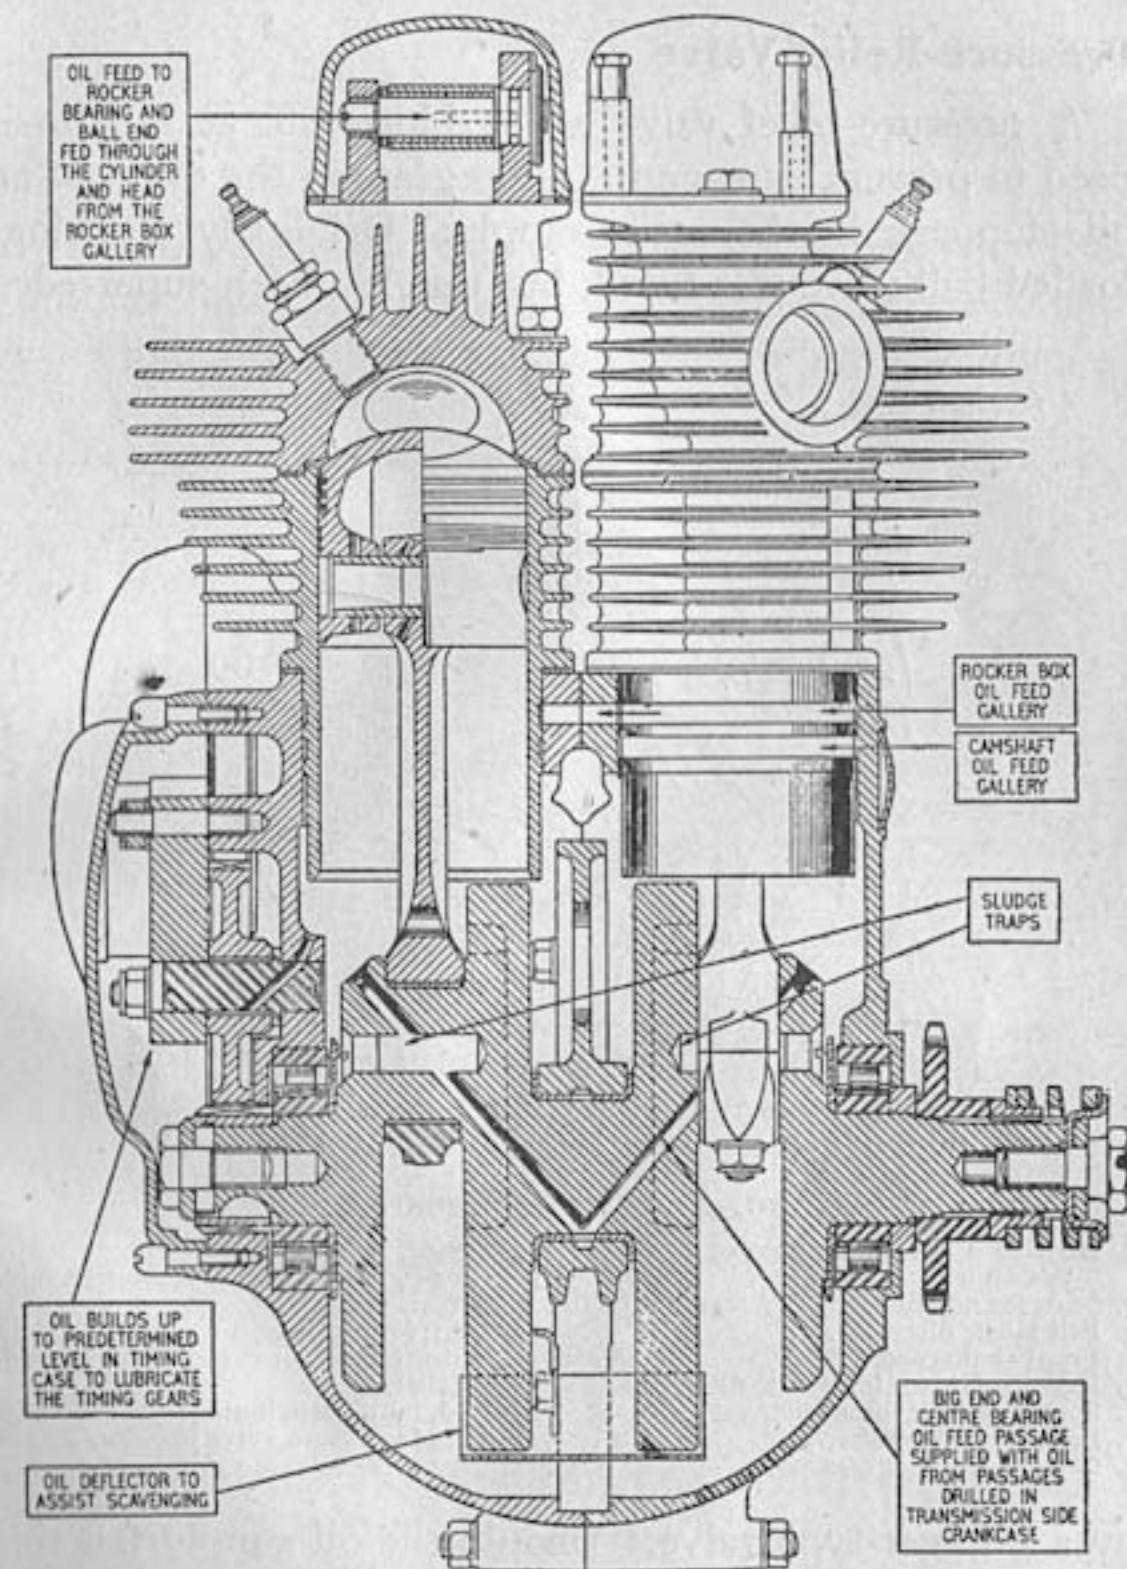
CROSS SECTION OF ENGINE SHOWING OIL GALLERIES, OIL PASSAGES, OIL DEFLECTOR AND SLUDGE TRAPS.
